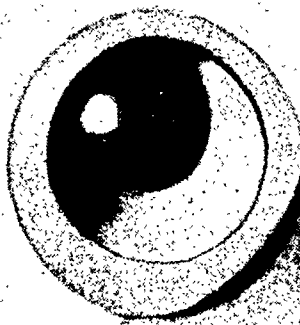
New unused bearing ball of type manufactured expressly for use in rotating-anode tubes. (Magnified.)
